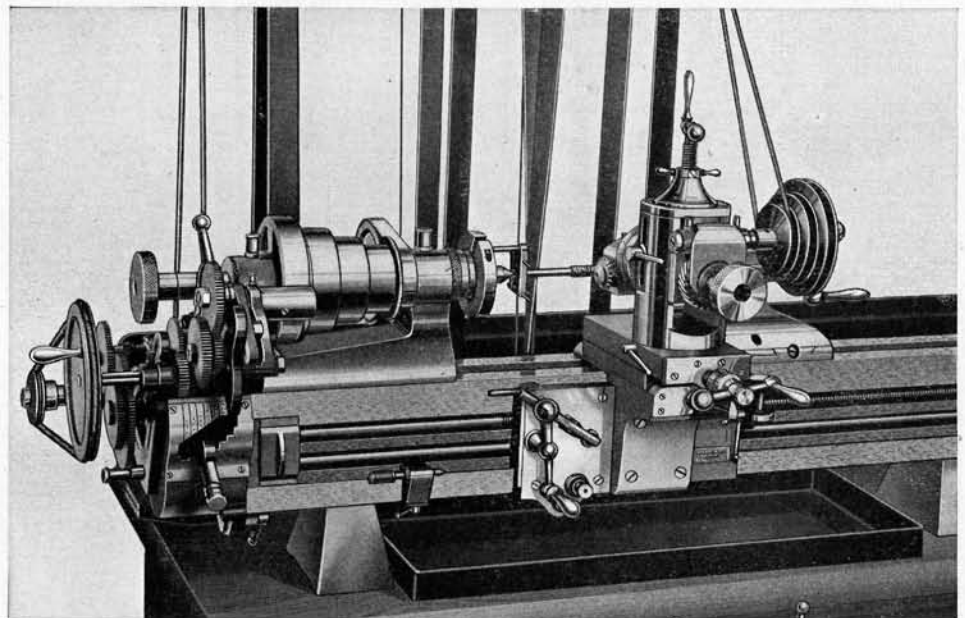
a. Showing lathe with traverse miller, spiral attachment, and countershaft attachment for driving traverse miller and grinding attachments.
